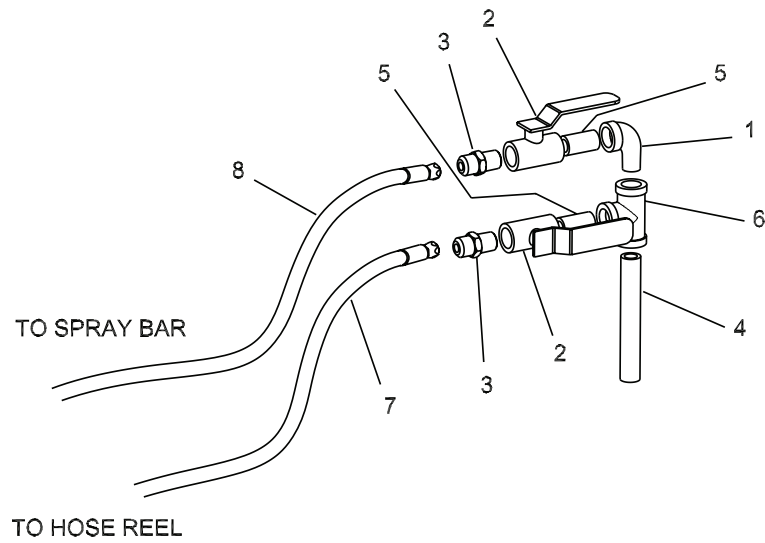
SPRAY SELECT VALVE ASSEMBLY, TRAILER
